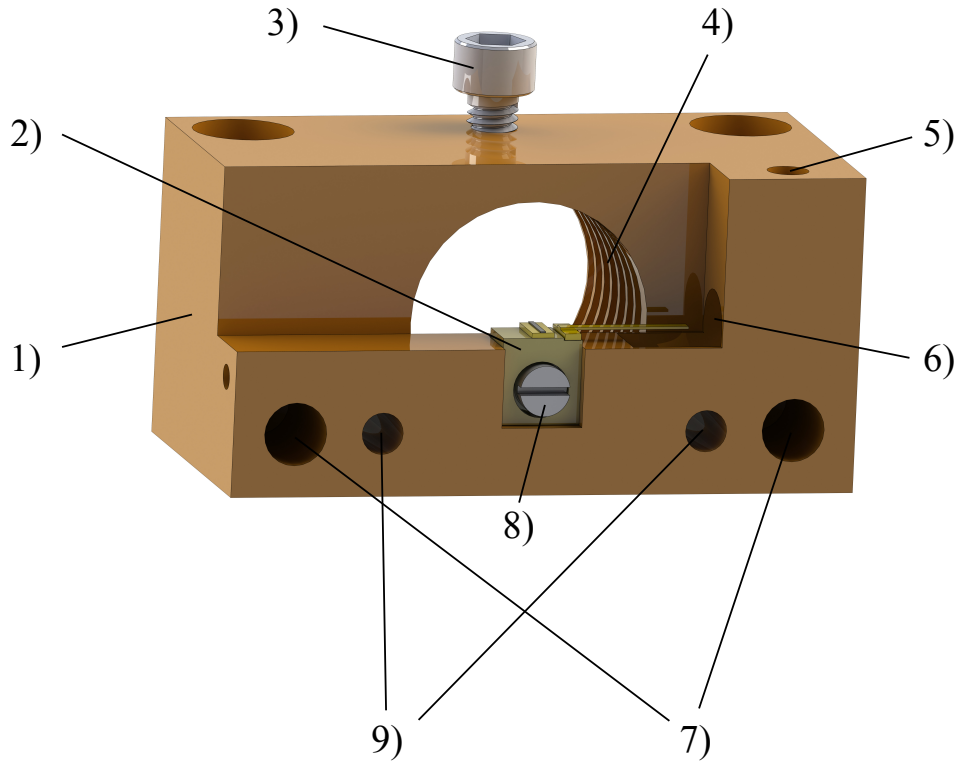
Copper mount for TA diode. 1) copper block, 2) TA chip housed in slot, 3) set screw for lens holder assembly and contact for anode, 4) coarse internal thread for lens holder assembly, 5) M4 threaded hole for set screw of guiding tunnel, 6) guiding tunnel for copper pin cathode, 7) clearance holes for centering rods, 8) M2 screw, 9) M4 threaded holes.
